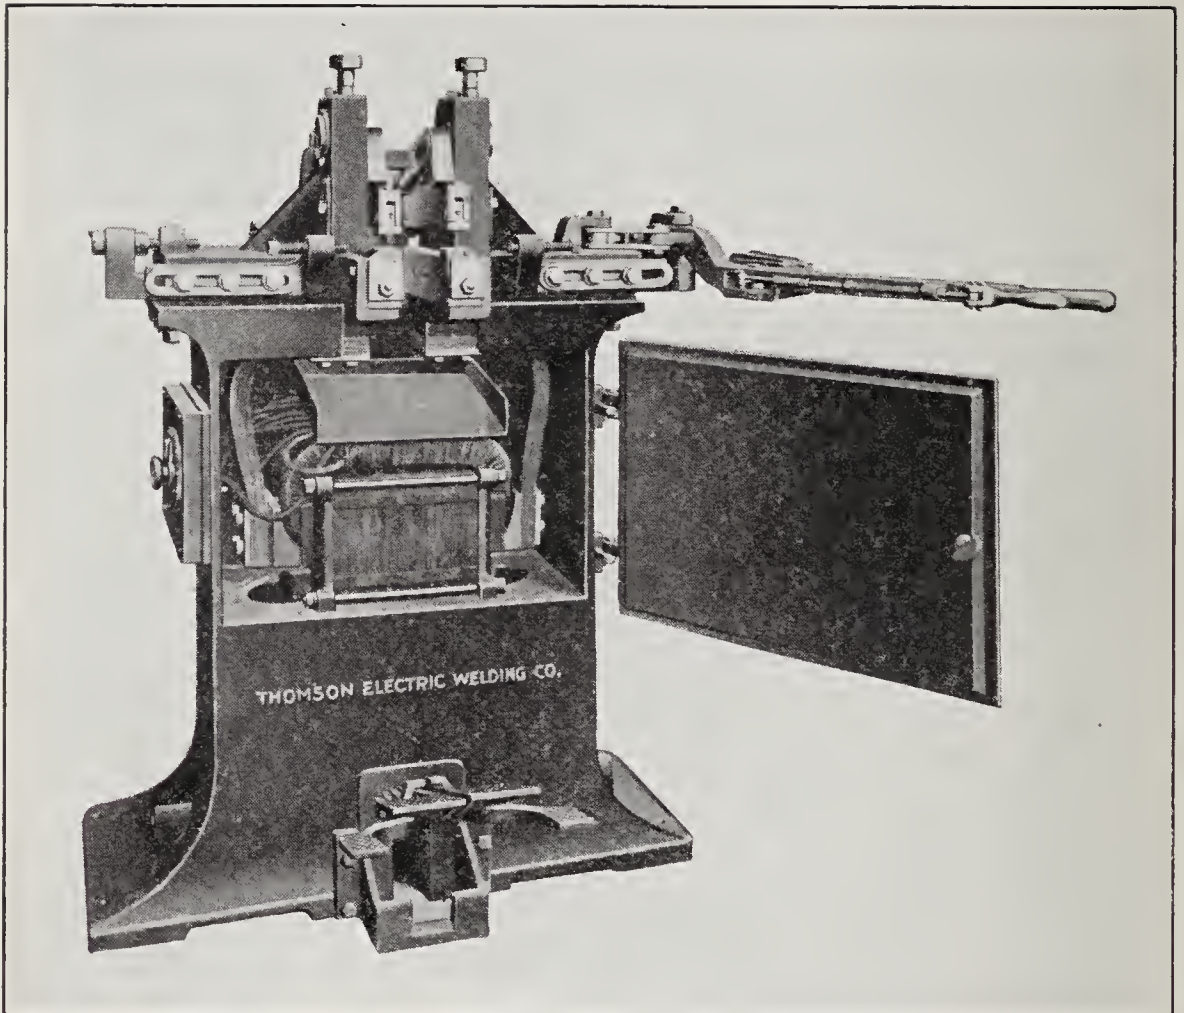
Thomson automatic electric welder with step-down transformer in case beneath. The secondary winding is but a single turn. The regulator switch is on the outside of case at left. On top is a stationary head (left) and a movable head (right) to hold the pieces to be welded. The compression lever with switch handle are at the extreme right.
